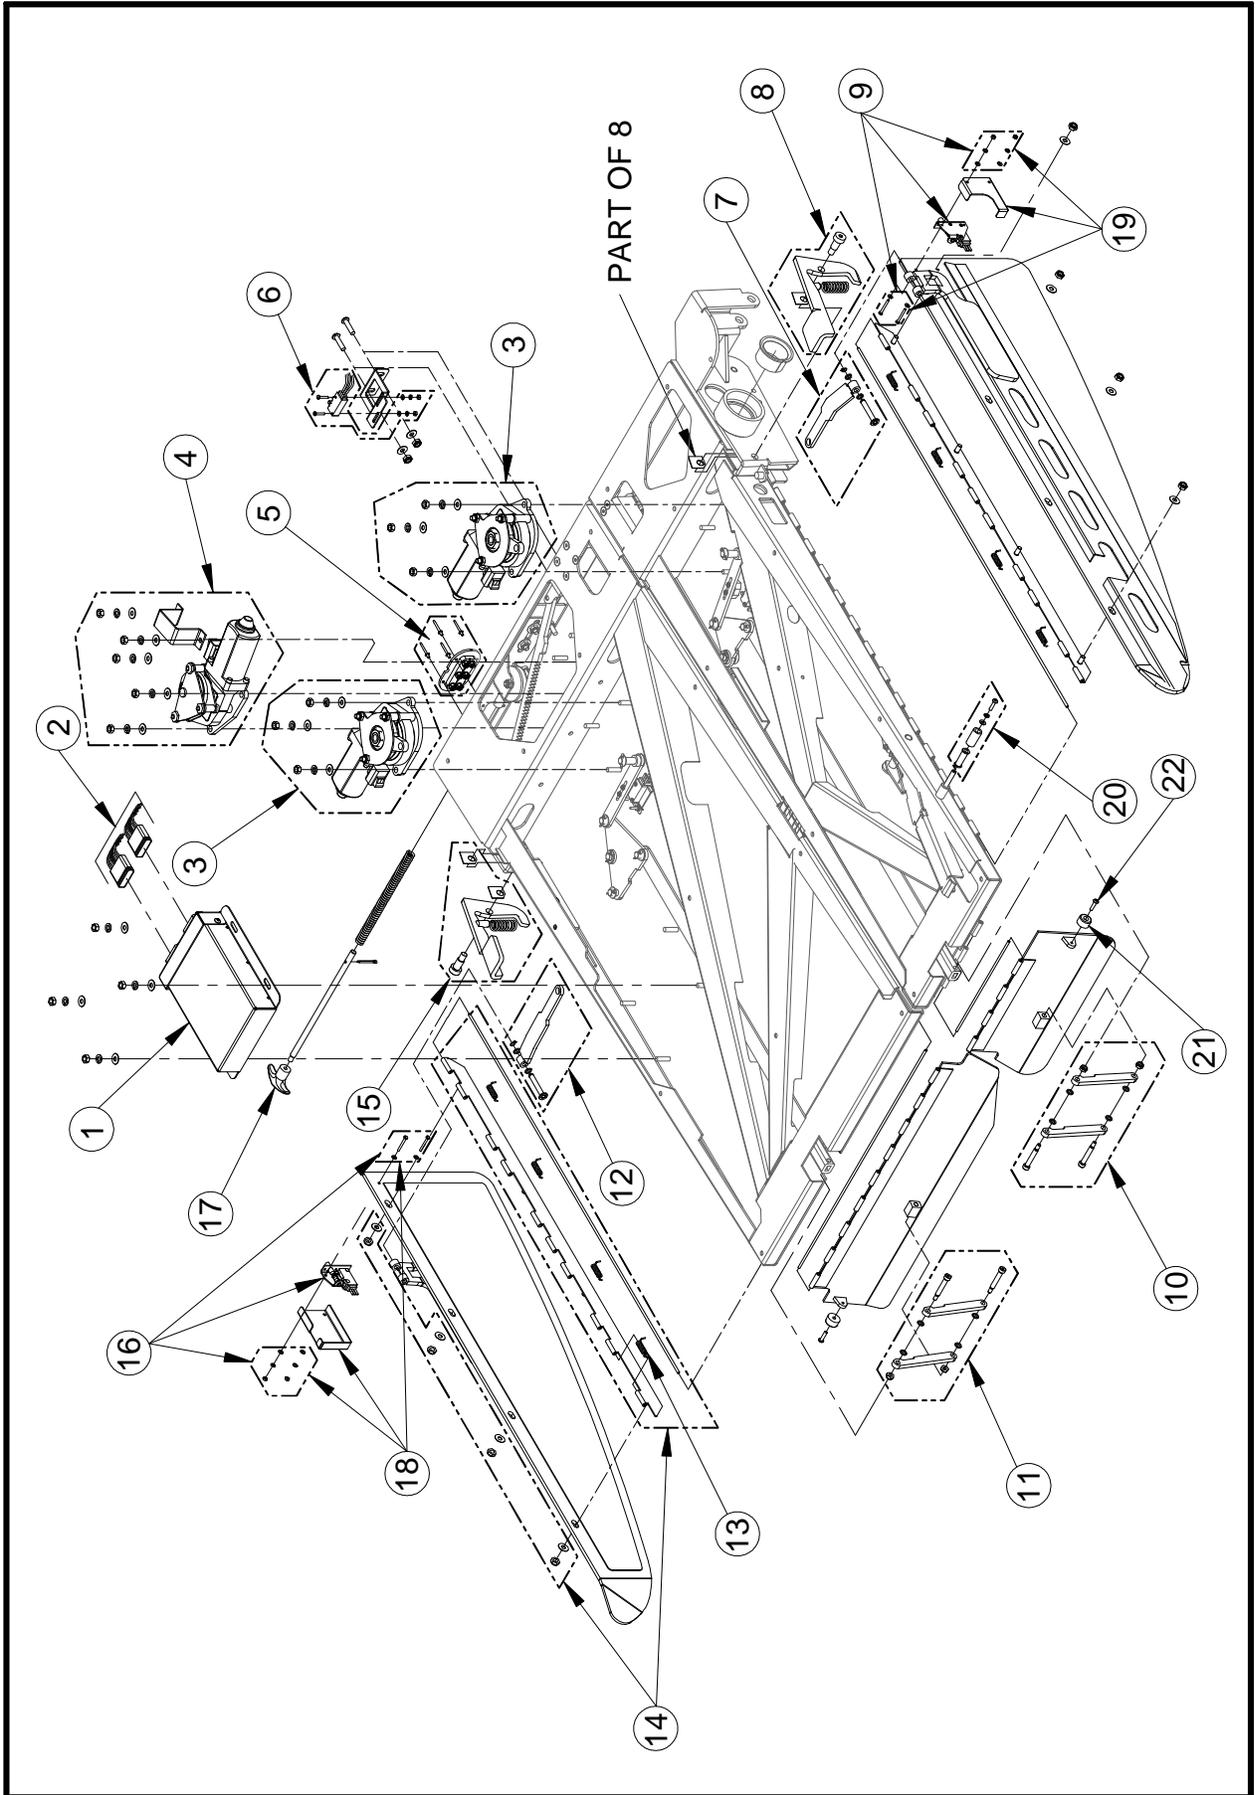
FRONT PLATFORM ASSEMBLY – SHEET 2
